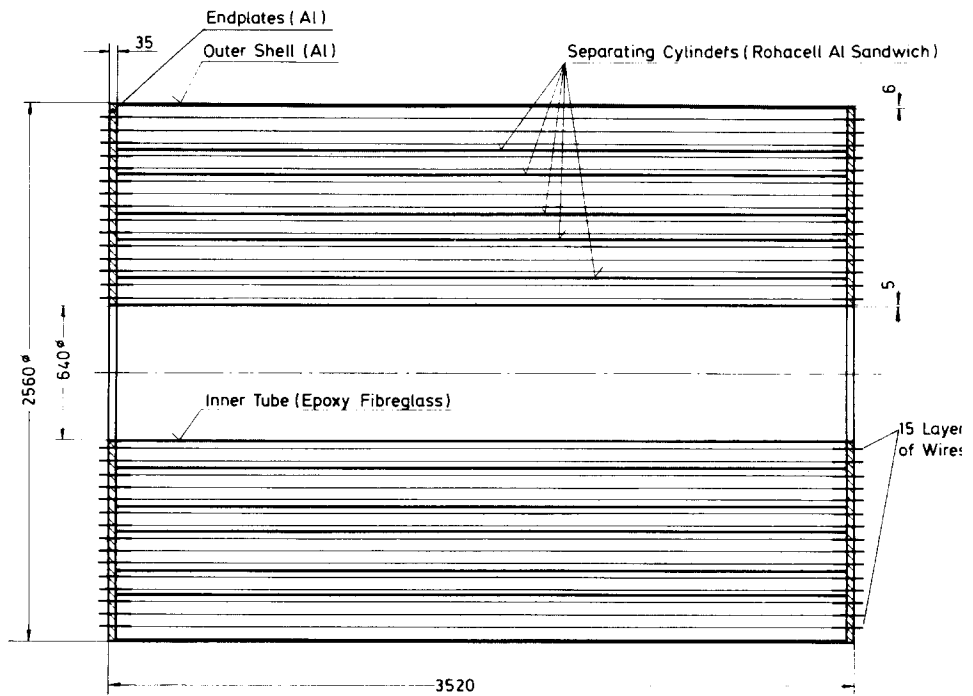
Schematic drawing of the drift chamber (dimensions in mm).
